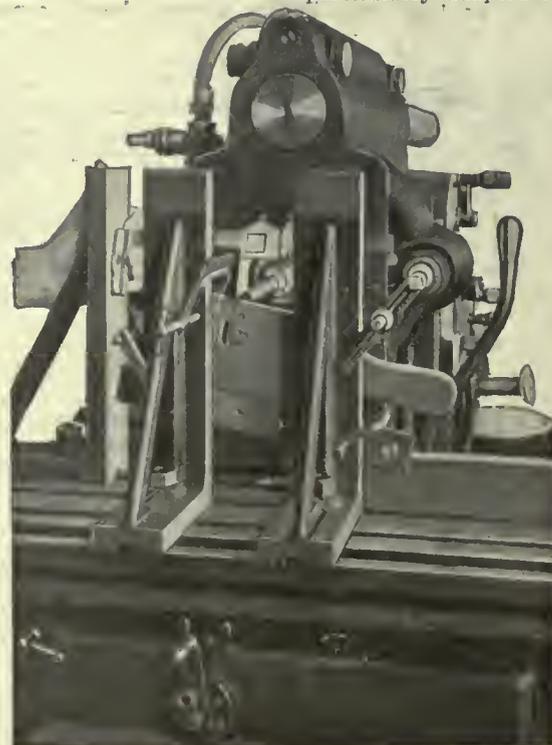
A SET OF MEASURING IRONS USED FOR A BORING SET UP ON A MILLING MACHINE.
